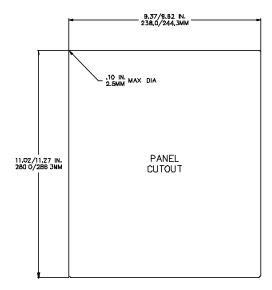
665 Panel Mount Cut-Out Dimensions
